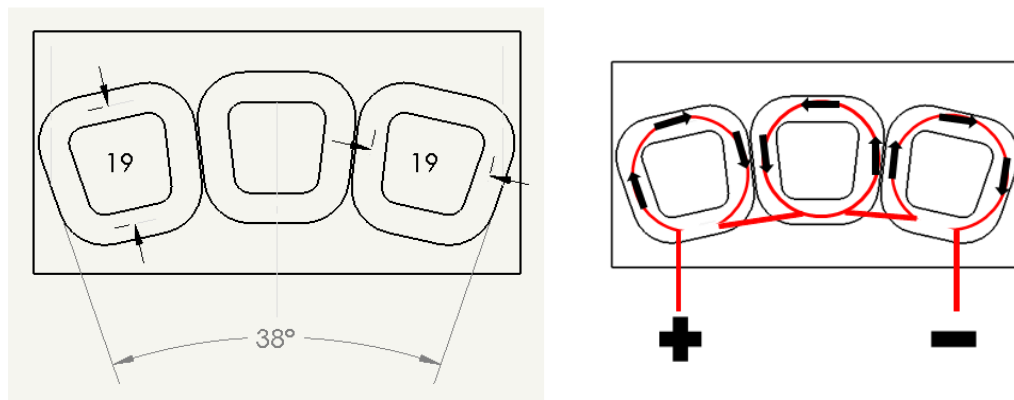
Coil layout, left, and coil winding pattern, right, dimensions in mm
